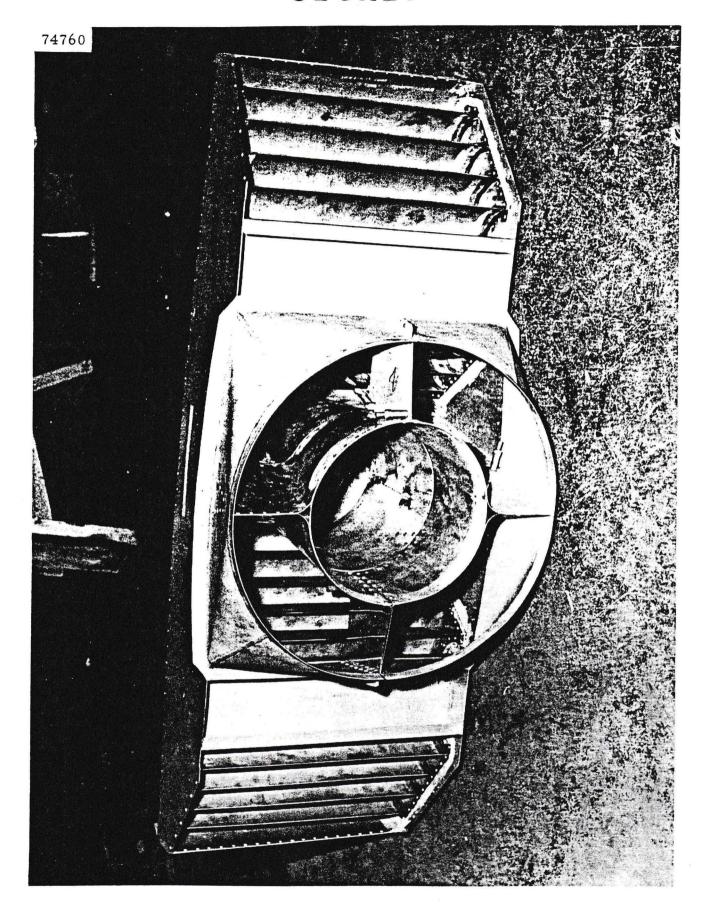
SPECIAL AIR INTAKE FOR A. S. VIPER ENGINE
